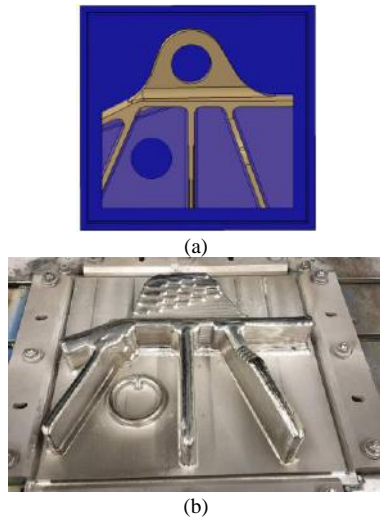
(a) Design and (b) blank manufacturing of an integrated demonstrator.
